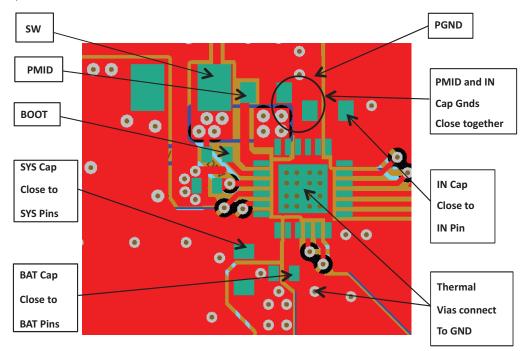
Recommended bq24266 PCB Layout for QFN Package
